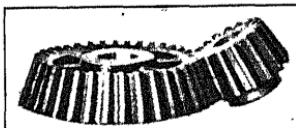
Angle gears. The Link Belt Co., Chicago.
